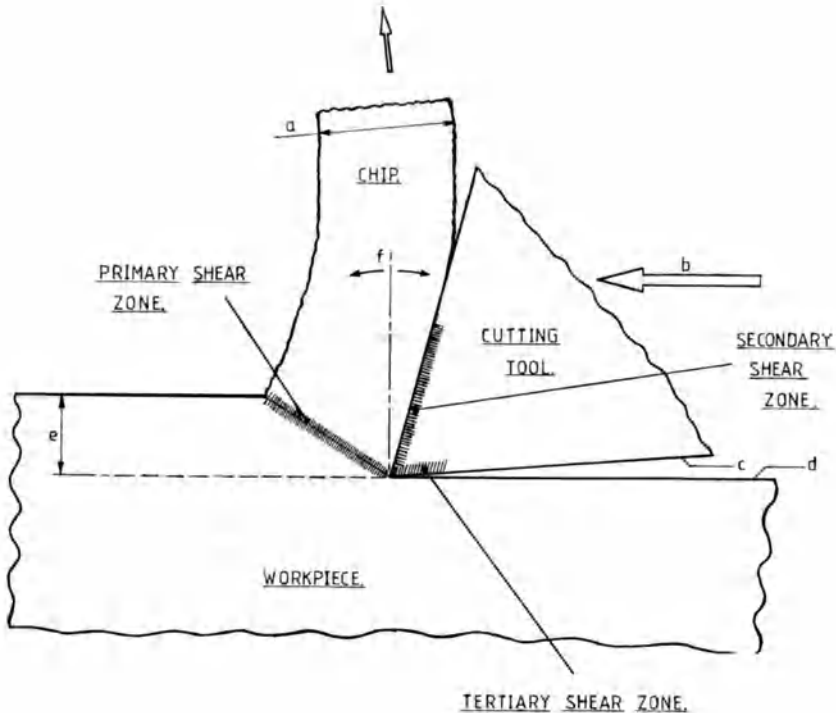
Schematic diagram of stock removal process. a chip thickness; b cutting speed; c tool flank; d machined surface; e depth of cut; f rake angle.
